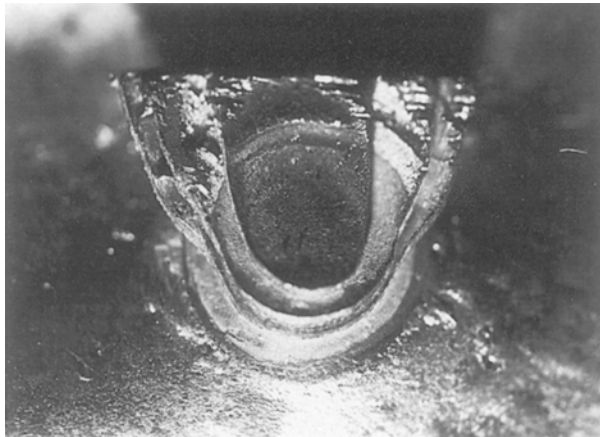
Typical stepped weld button from a peel test specimen.
